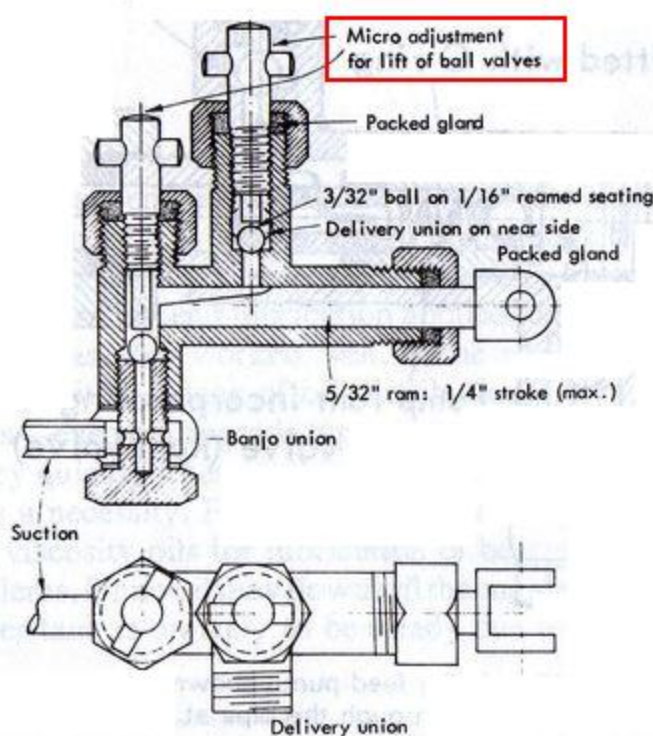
The high-speed boiler pump, shown approximately full-size
